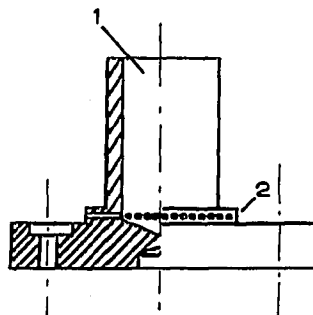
Mobile phase distributor – sectional view. 1 = hollow space of the distributor – for mobile phase and porous material (glass wool); 2 = system of capillary hollows.
